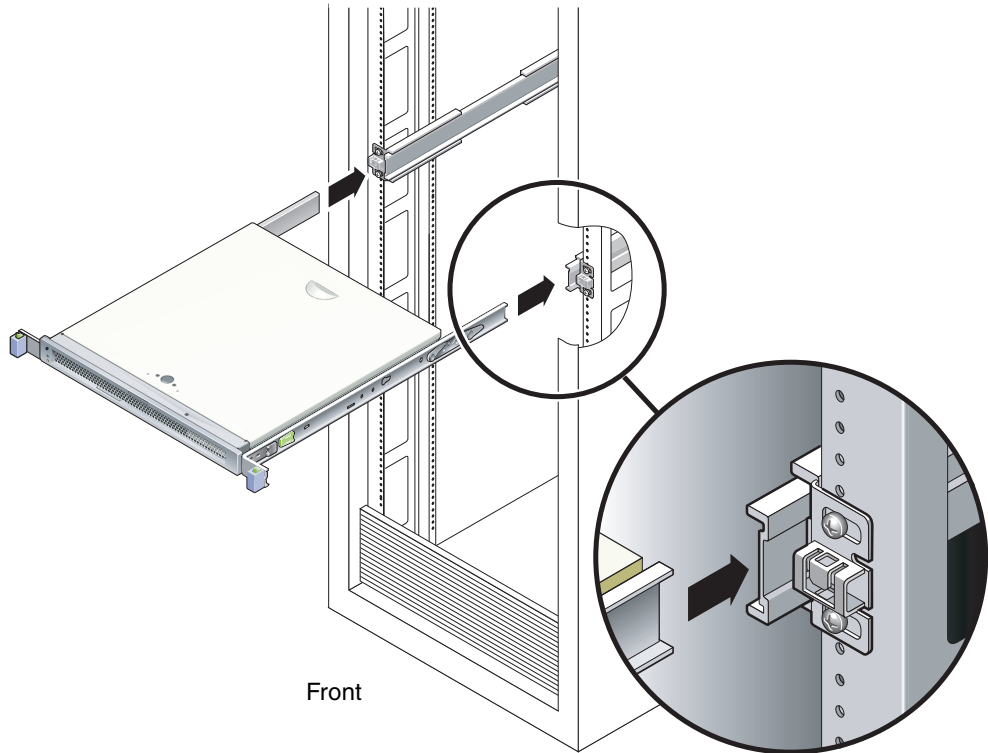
Mounting the Chassis on the Slide Rails
